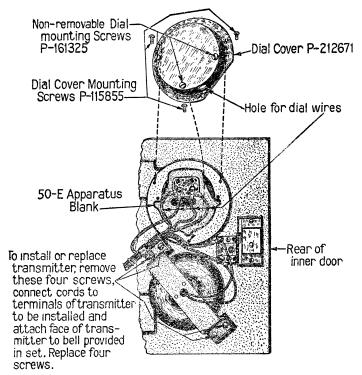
Rear View of Inner Door (with apparatus blank in place).
